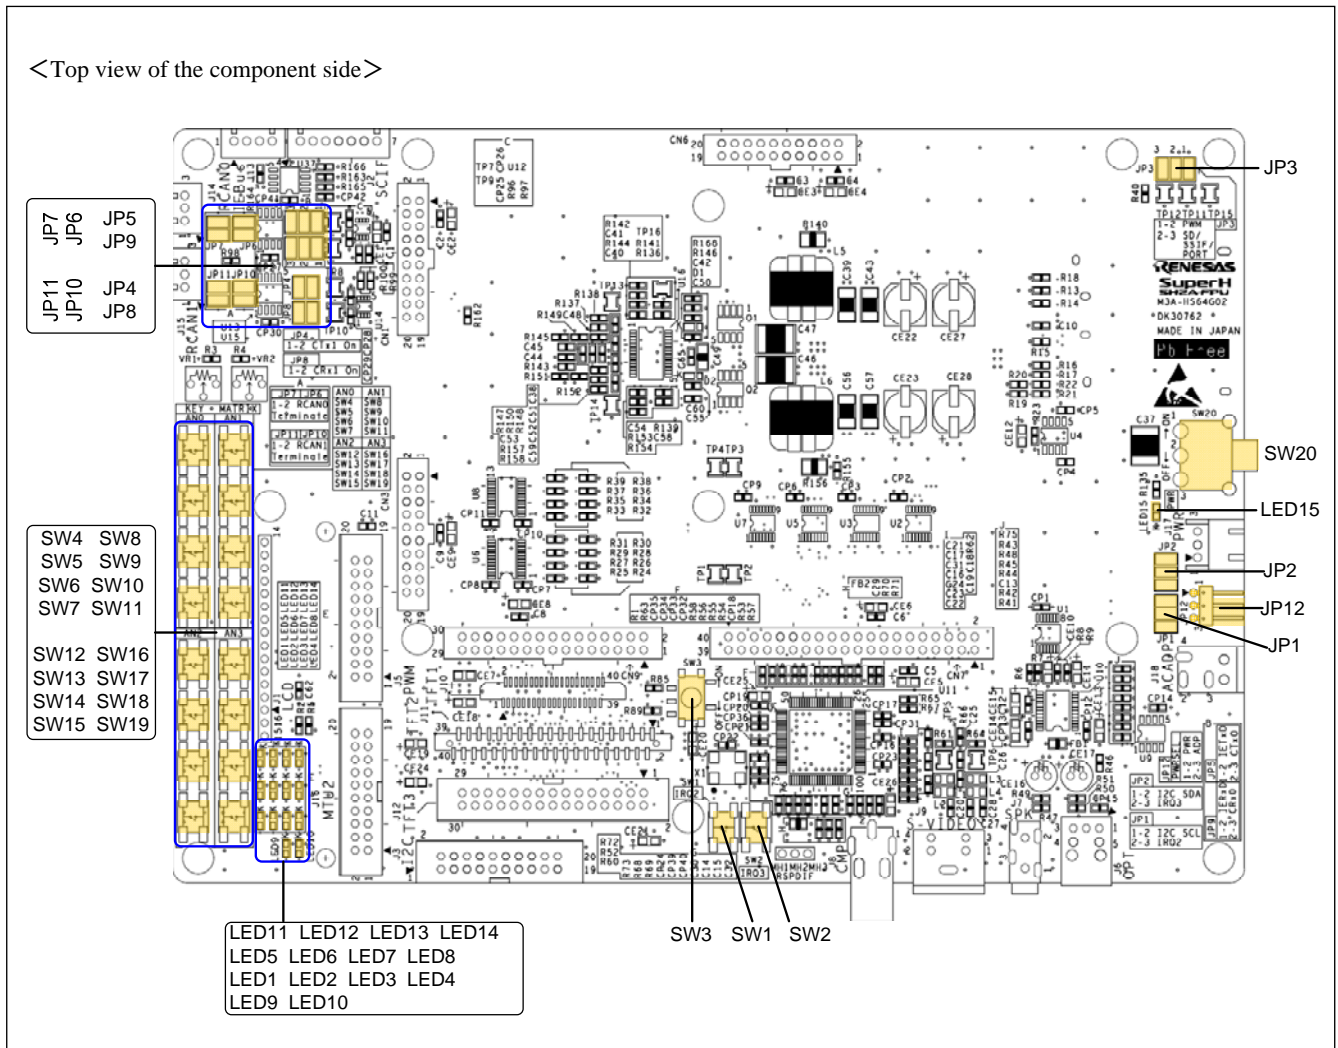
M3A-HS64G02 Operation Parts Layout
